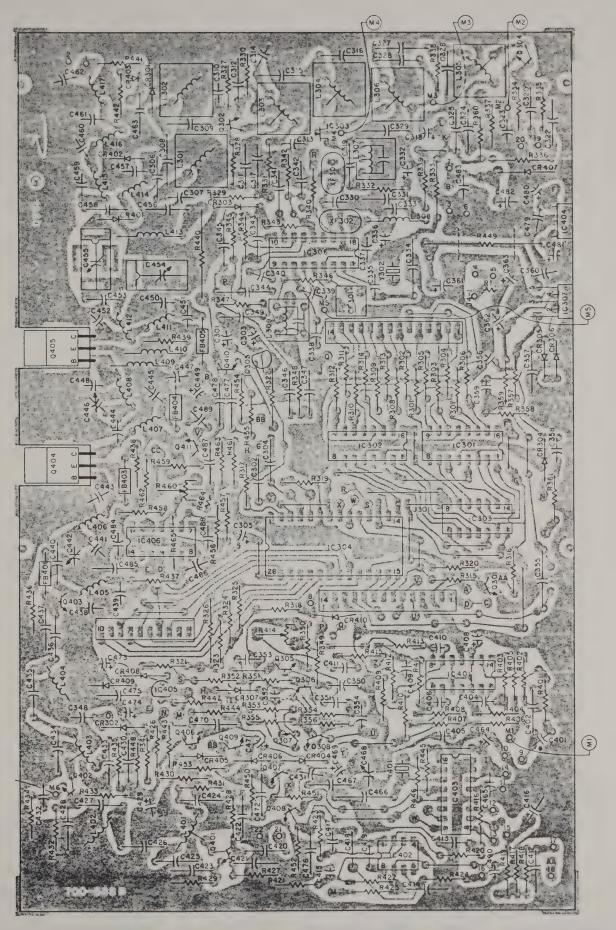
B. Parts Placement, Main PCB Assembly; Bottom View.
